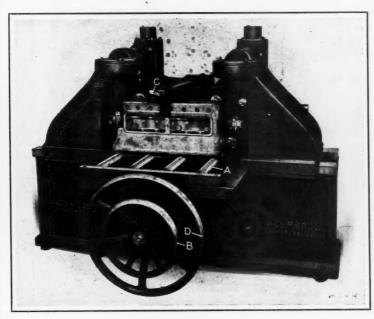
Six-spindle Milling Machine used to finish the Locating Bosses
